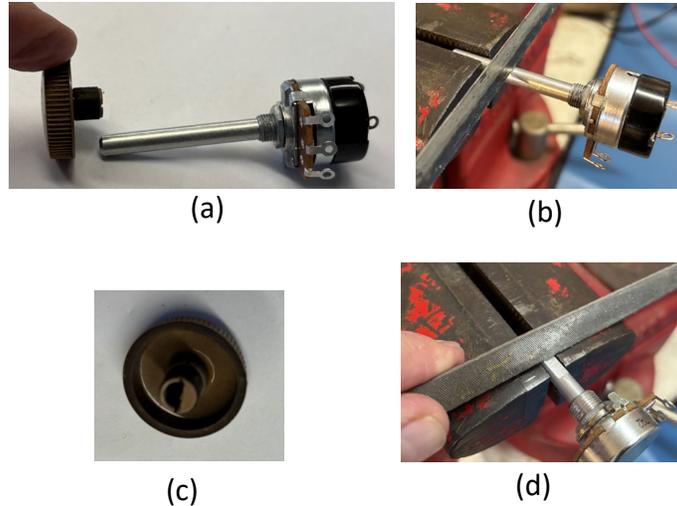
Cutting potentiometer shafts. (a) Make sure to measure how far the shaft extends into the knob. (b) When cutting the shaft, clinch the discarded end in the vise. (c) Example of a knob with a flat side. (d) Make sure to file only what is necessary – otherwise press-fit knobs can slip off.
